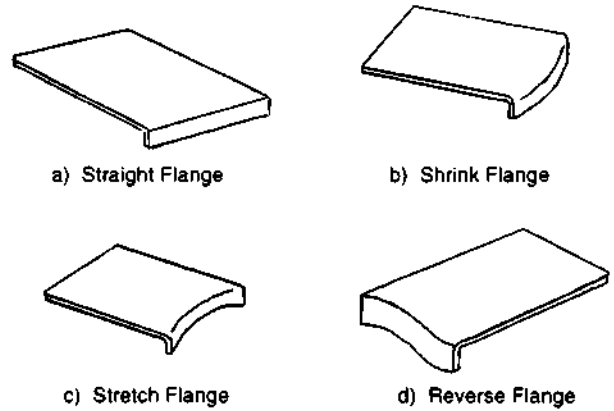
D8 Various types of flanges: a) straight flange, b) shrink flange, c) stretch flange, d) reverse flange.
